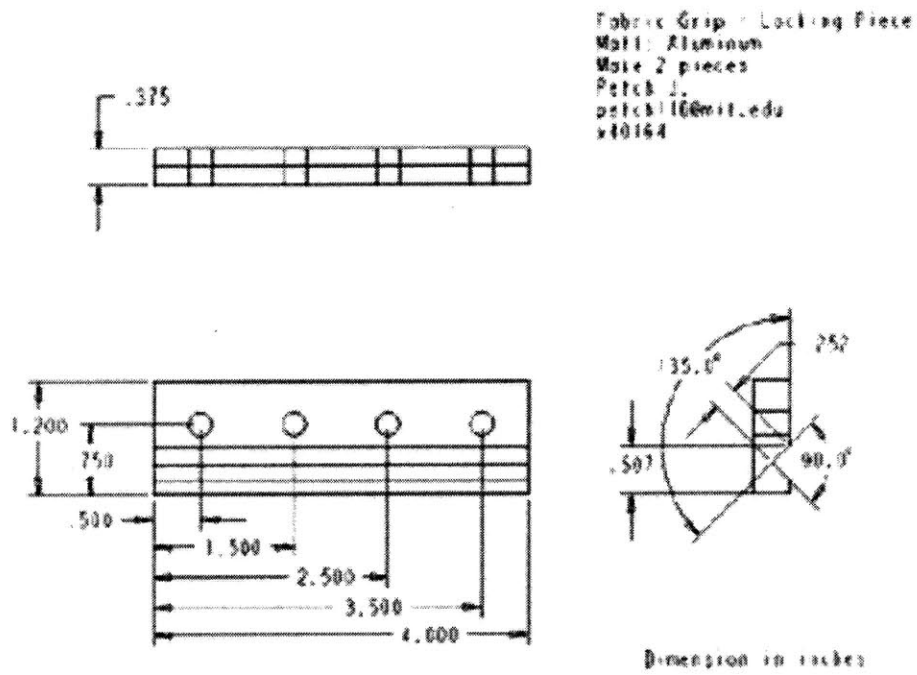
Drawings of fabric uniaxial tensile grip (B)
